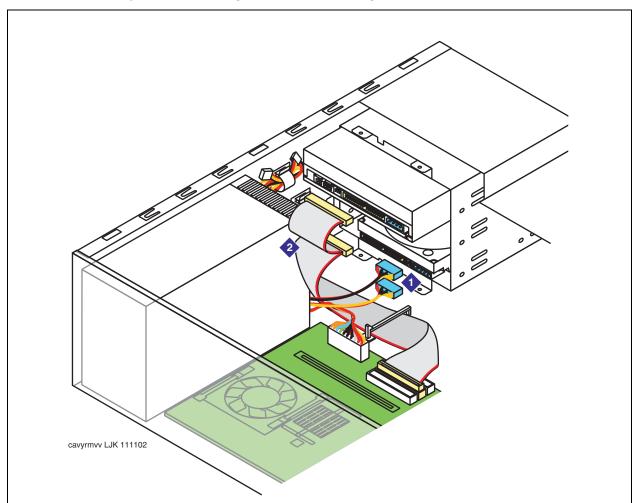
S3400-family MAS drive cage cables—nonintegrated video and LAN
